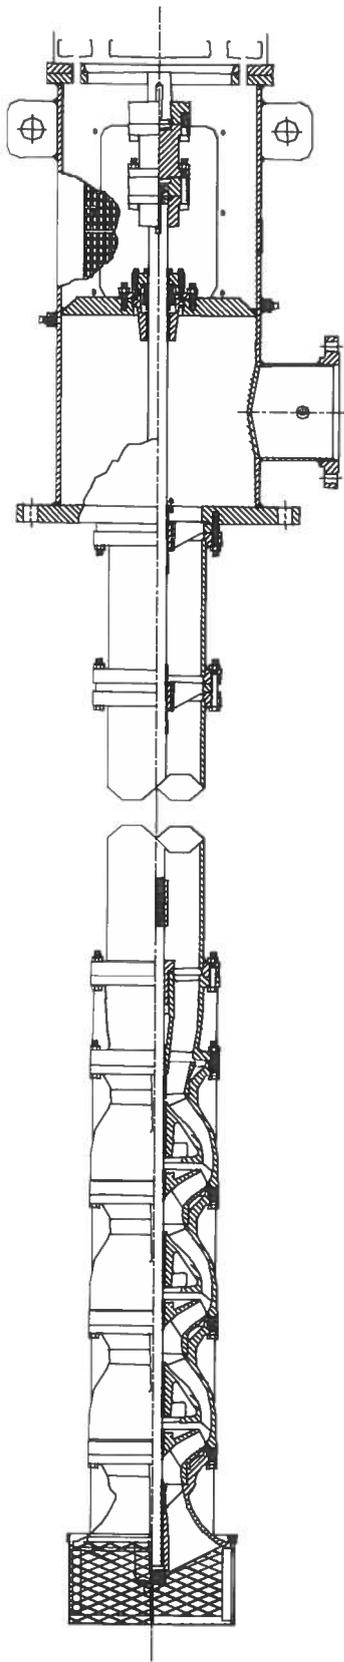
Open line-shaft, product-lubricated, vertical turbine pump
